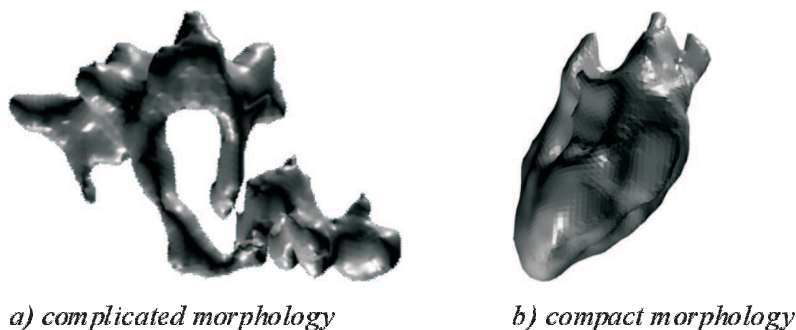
3D models of casting defects identified by the X-ray tomography
